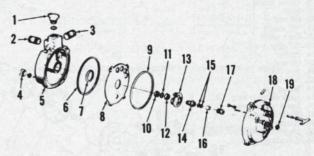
Exploded view of Model 121TP2-1 and 121TP2-1A trash pump. Model 112TP2 is similar but washers are used in place of spacer (16)
